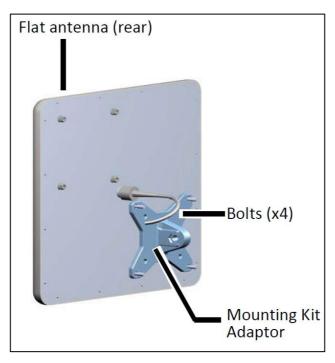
Flat Panel antenna - rear with mounting kit adapter
